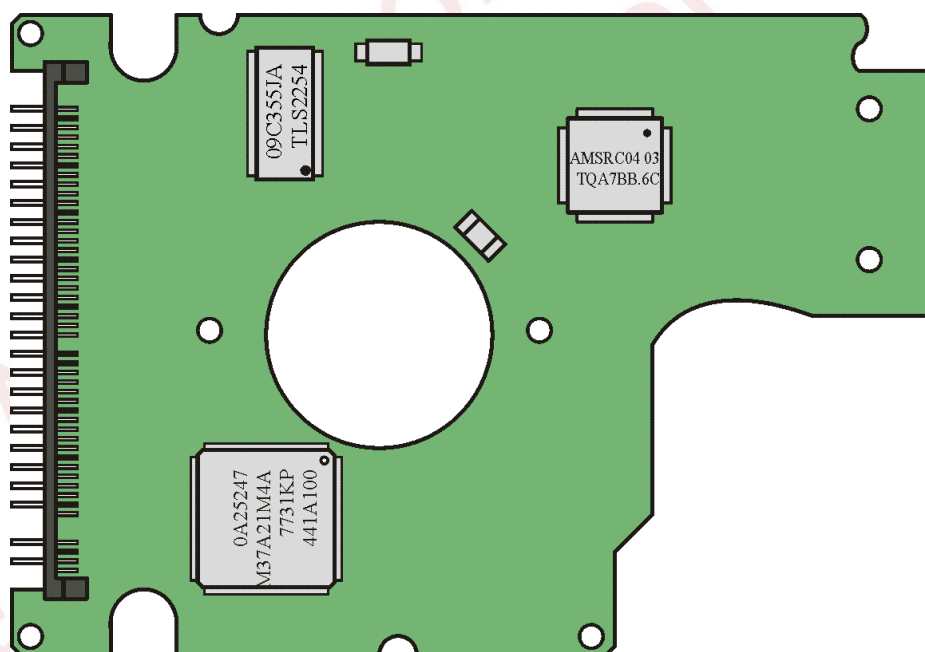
External view of the controller board in 32GH, DJSA drive family.
